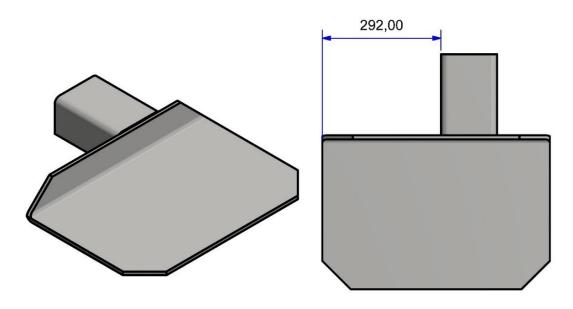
(Assembly 3 – Standard Wheel Rest Plate and Outer Sleeve)
